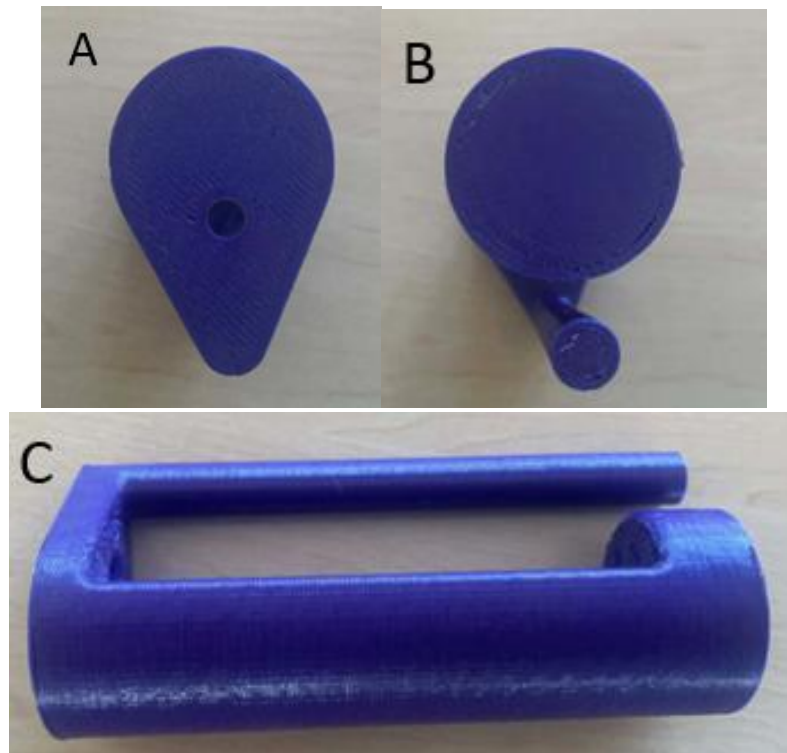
Printed Push Part, A – Top View; B – Bottom View; C – Side View
